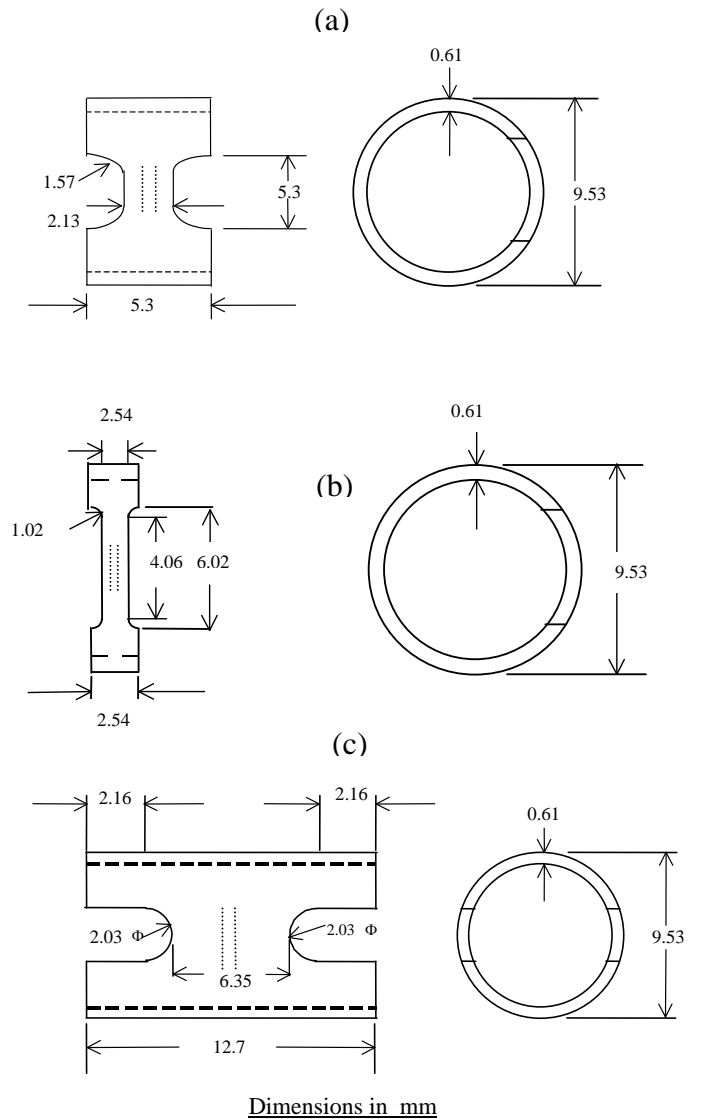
Specimen Dimensions for mechanical testing. (a) type “C” specimen; (b) type “D” specimen and (c) plane strain specimen.
